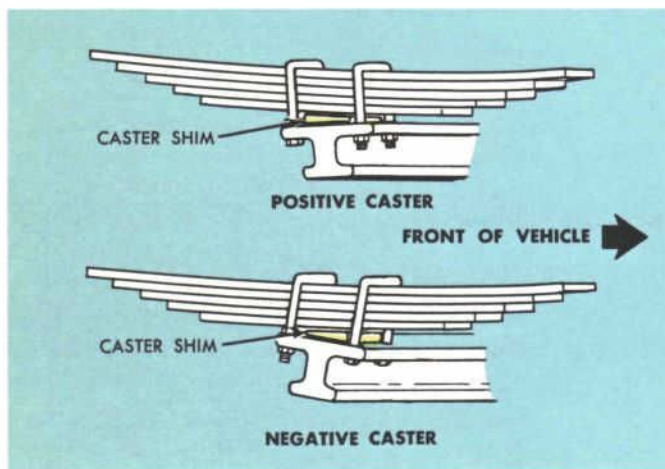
Adjusting Caster Angle With Tapered Shims on Solid Beam Axles
